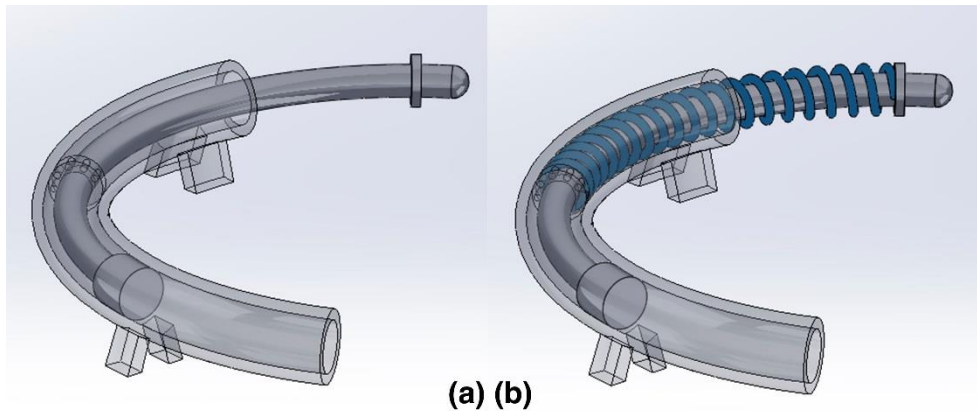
(a) Piston in the air tube (b) spring highlighted in blue.
